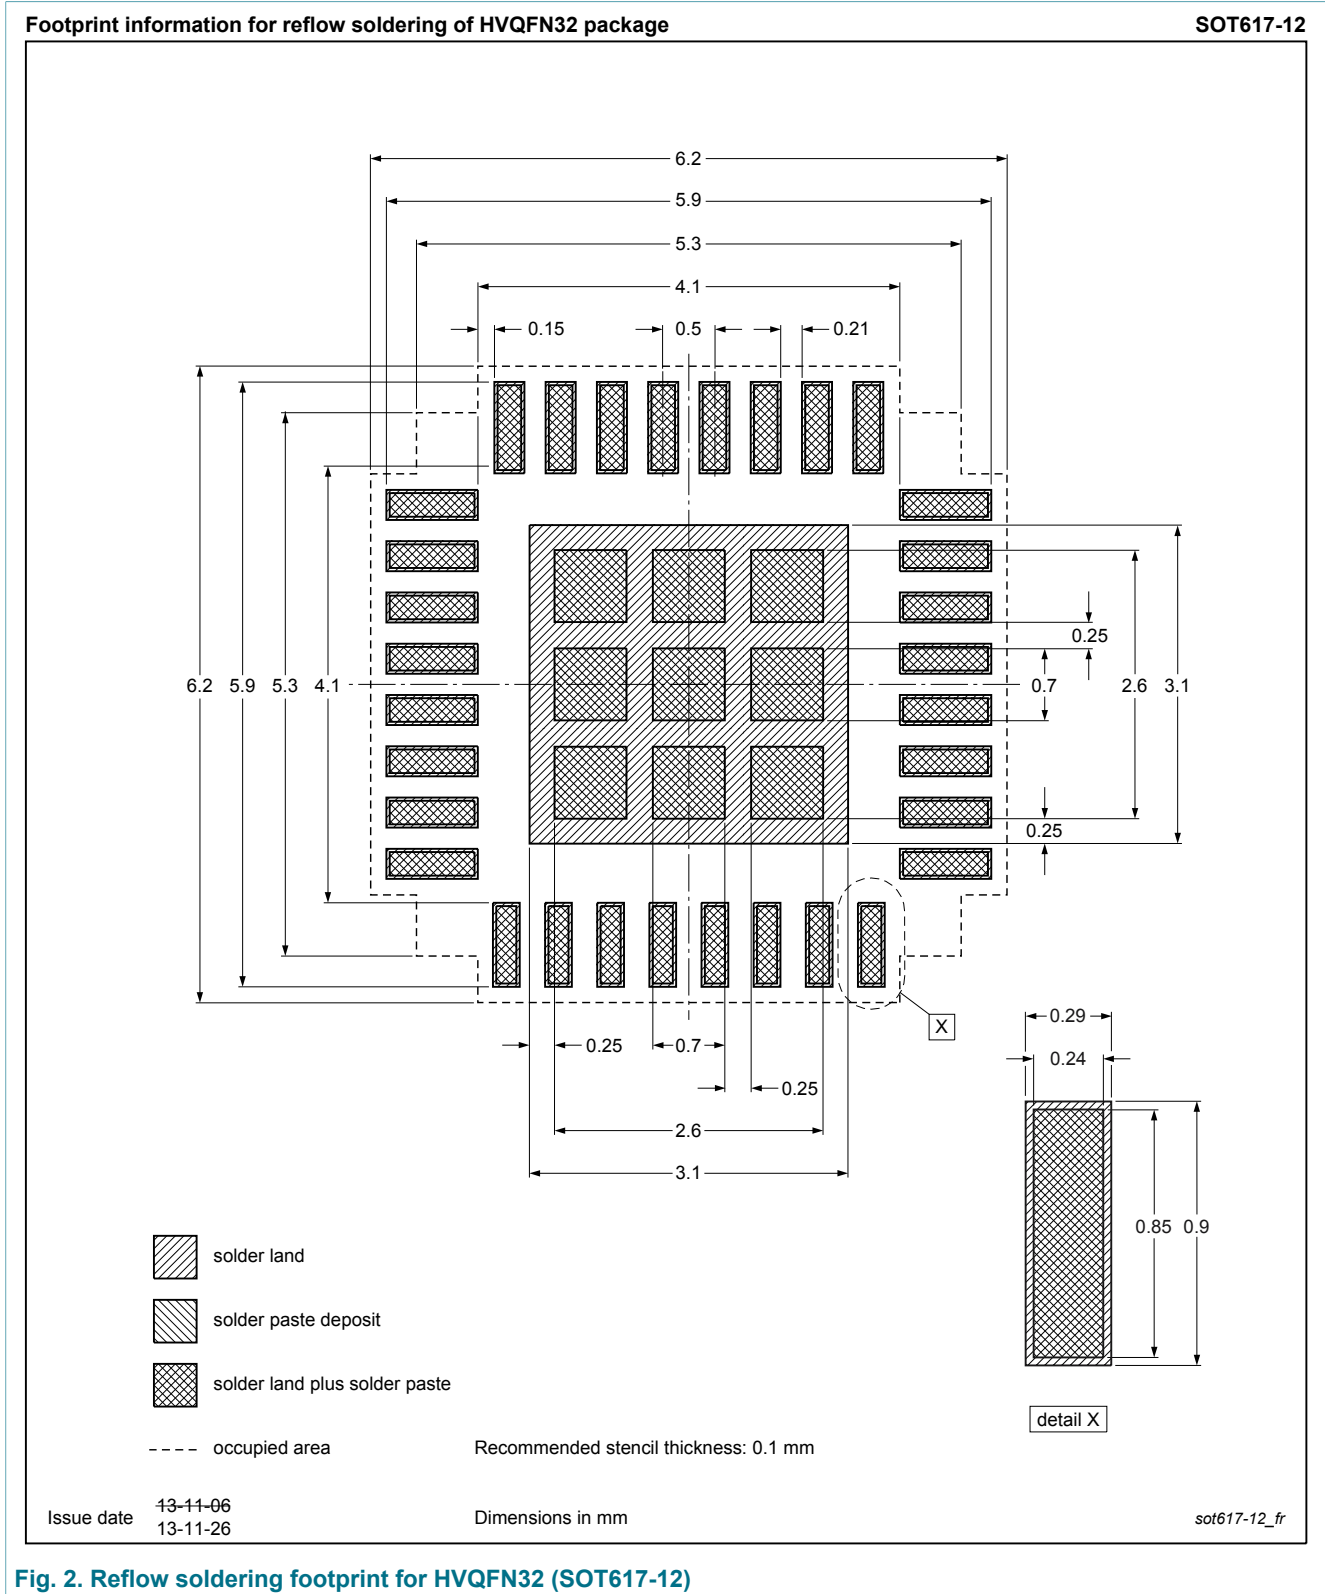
Reflow soldering footprint for HVQFN32 (SOT617-12)
